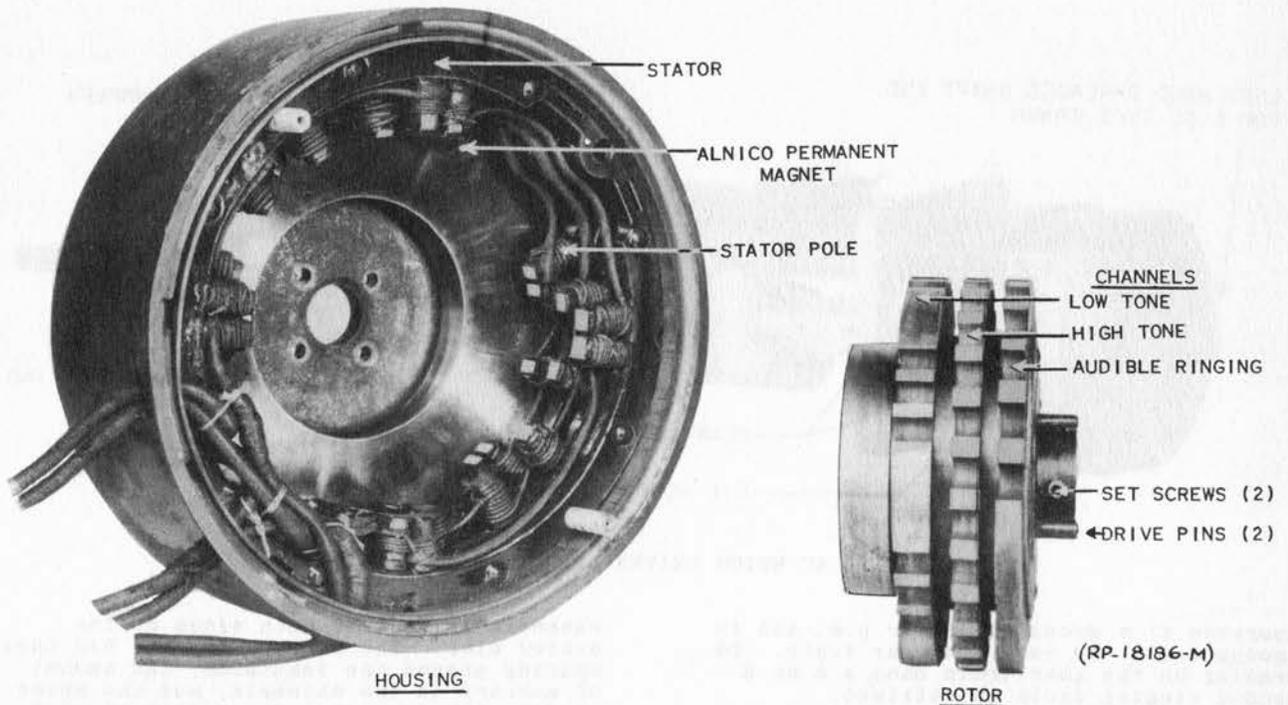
TONE ALTERNATOR ASSEMBLY
